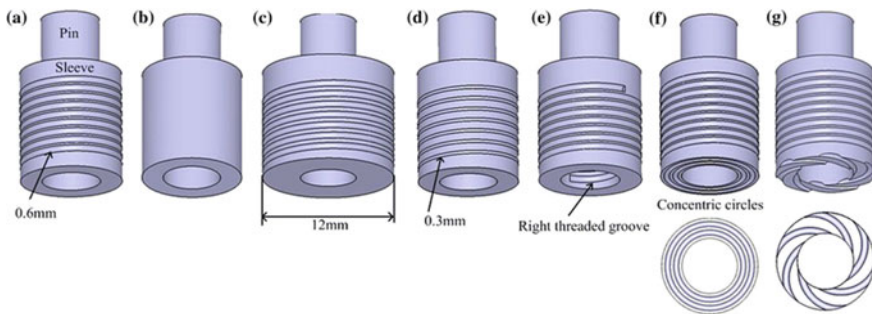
Tool models in the simulation process: a regular tool, b tool with a smooth surface, c tool with a large-diameter sleeve, d tool with a smaller groove width, e tool with a groove on the inner sleeve surface, f tool with concentric circles on the sleeve bottom and g tool with a scrolled groove on the sleeve bottom [120]
